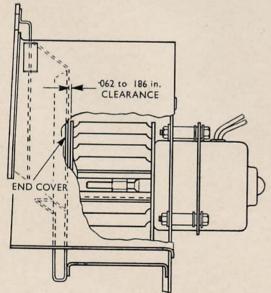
The runner (fan) must be positioned to give the clearance shown before tightening the nut securing it to the motor spindle
